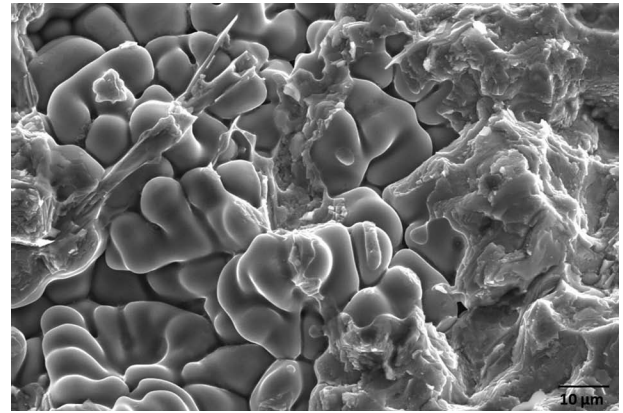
Higher magnified image of the specimen shown in Fig. 131
